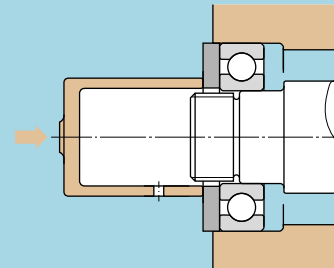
Press mounting of inner and outer rings simultaneously
